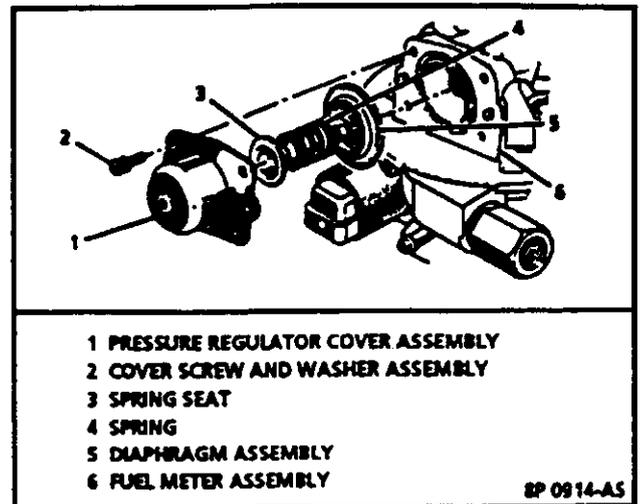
Throttle Body Injection 700 Pressure Regulator
